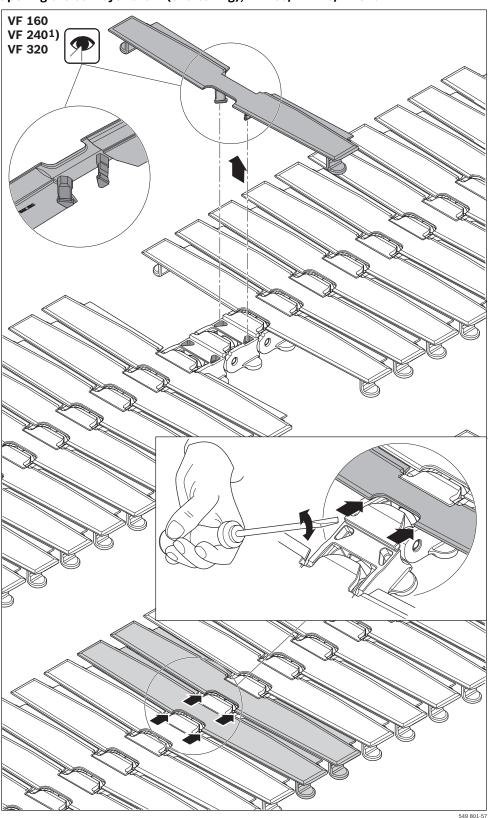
Opening the conveyor chain (shortening), VF 160/VF 240/VF 320
